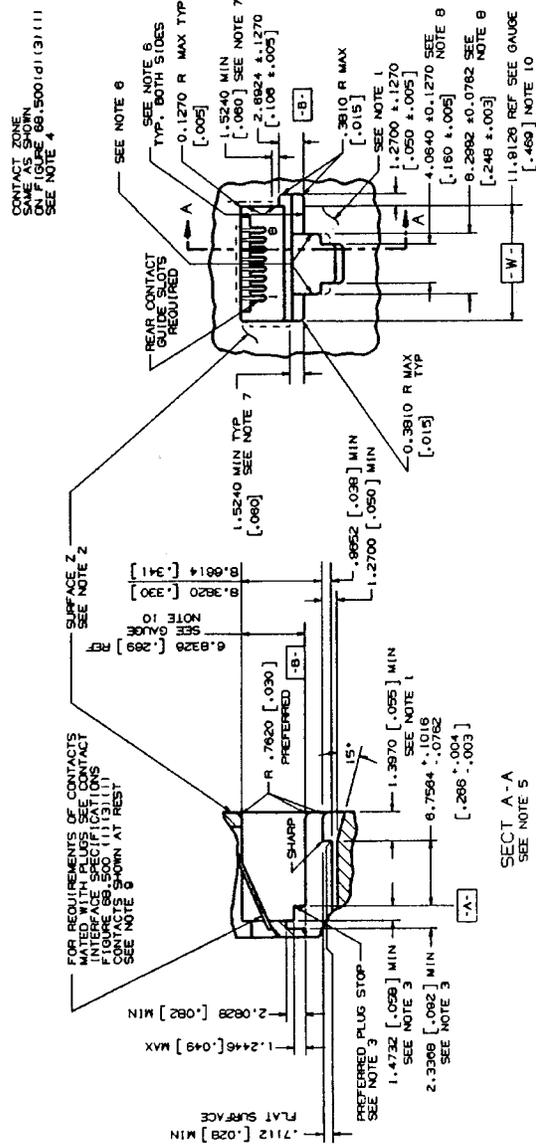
(1)(4)(i)-B POSITION KEYED PLUG
